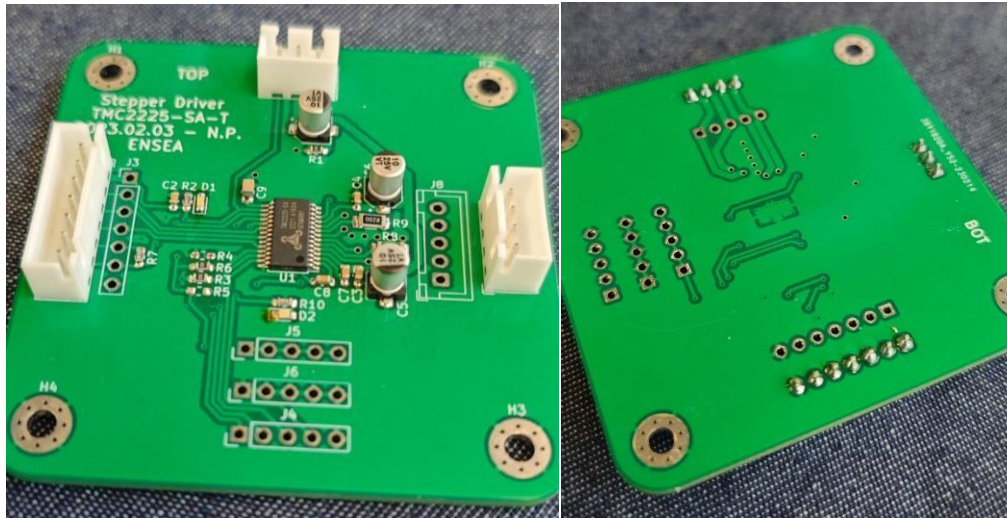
PCB oven soldering on top, hand soldering in bottom part
